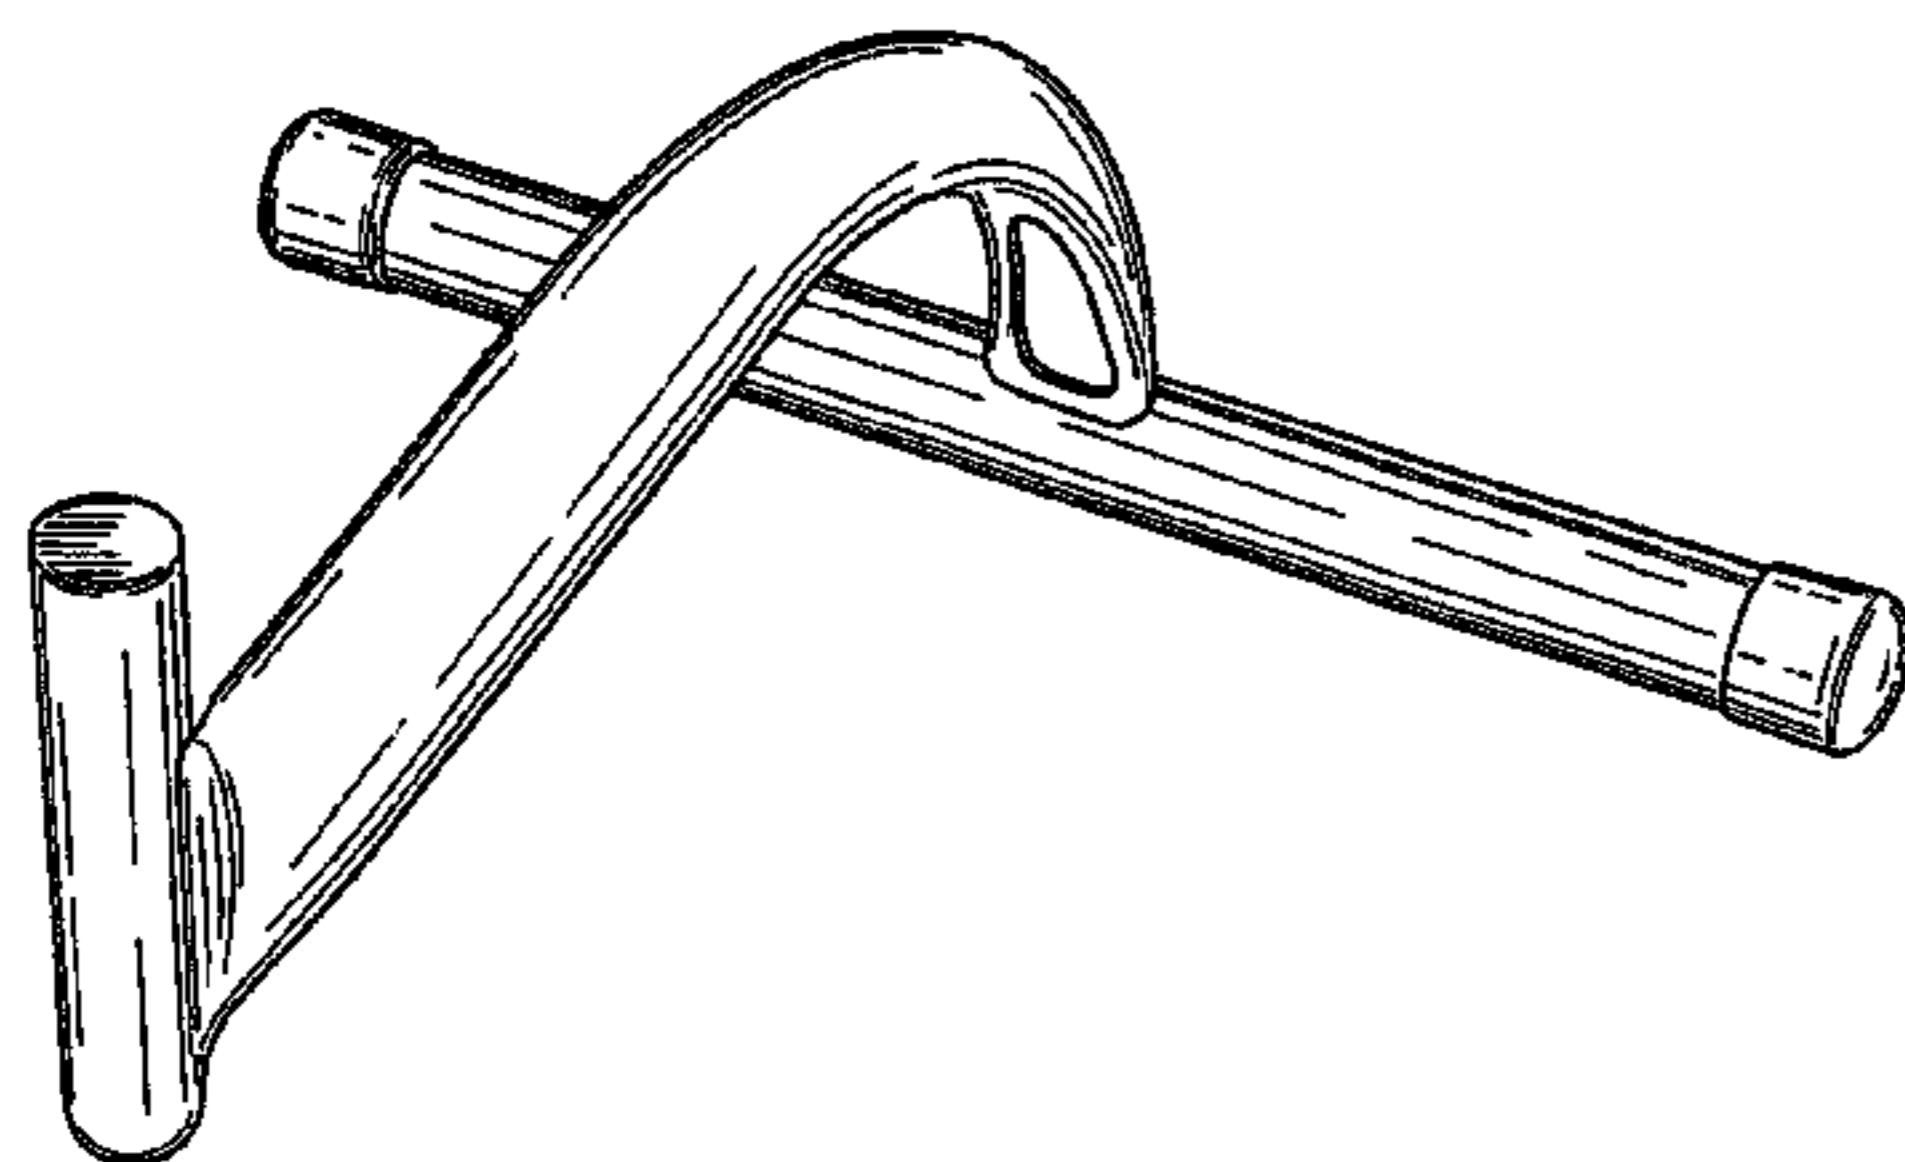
is a back view of the design embodiment shown in FIG. 1;
